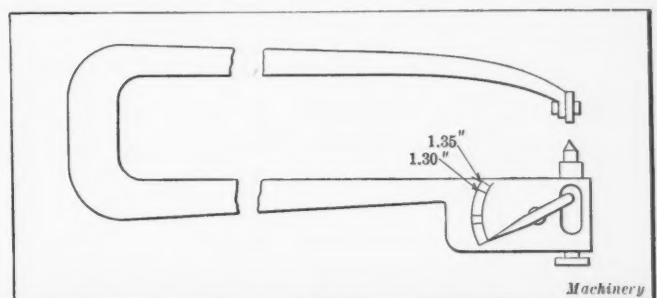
Caliper Gage used in Preliminary Government Inspection for testing Thickness of Shell Wall
